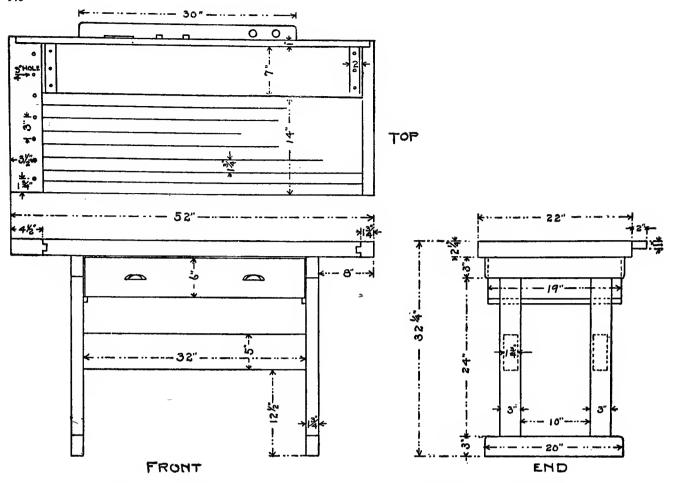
B—HOW TO MAKE A WOODWORKER'S BENCH
